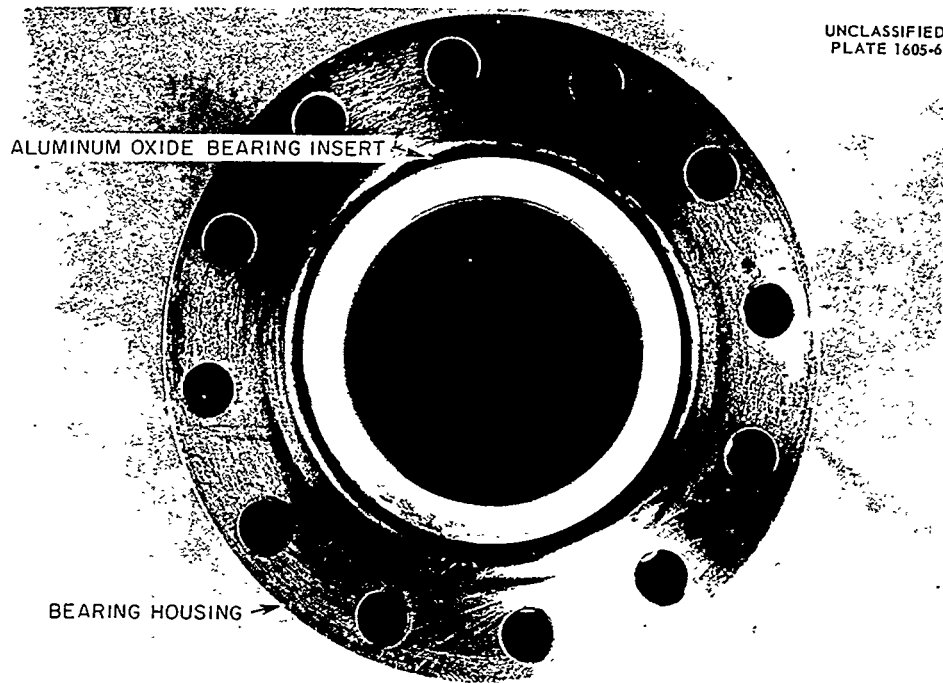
Aluminum Oxide Bushing and Bearing – Westinghouse Model 100A Pump.
